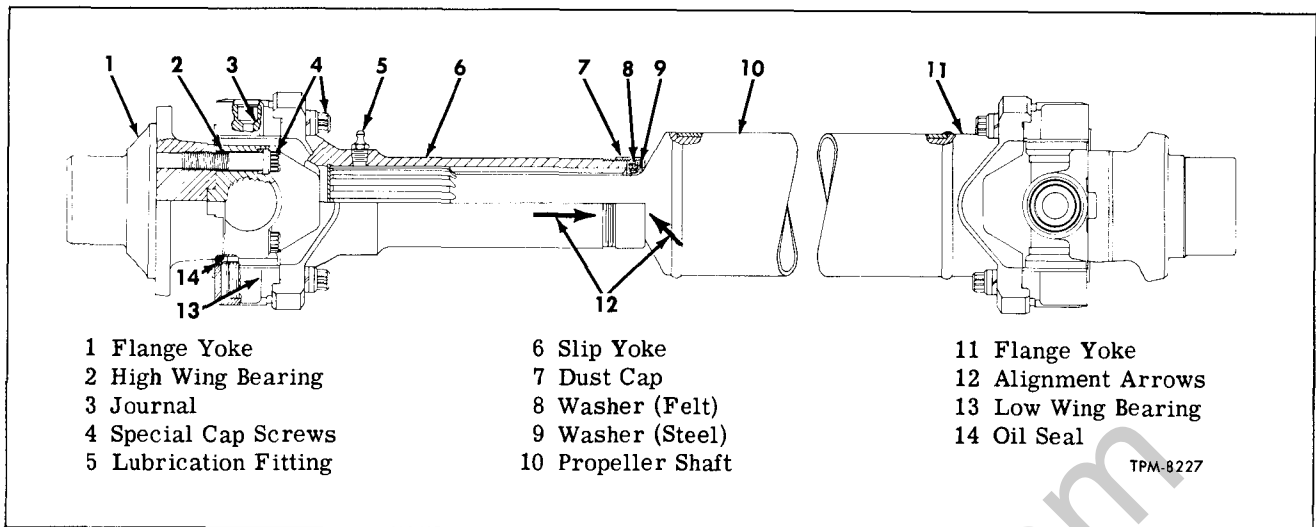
Typical Propeller Shaft with 58WB and 68WB Universal Joints
